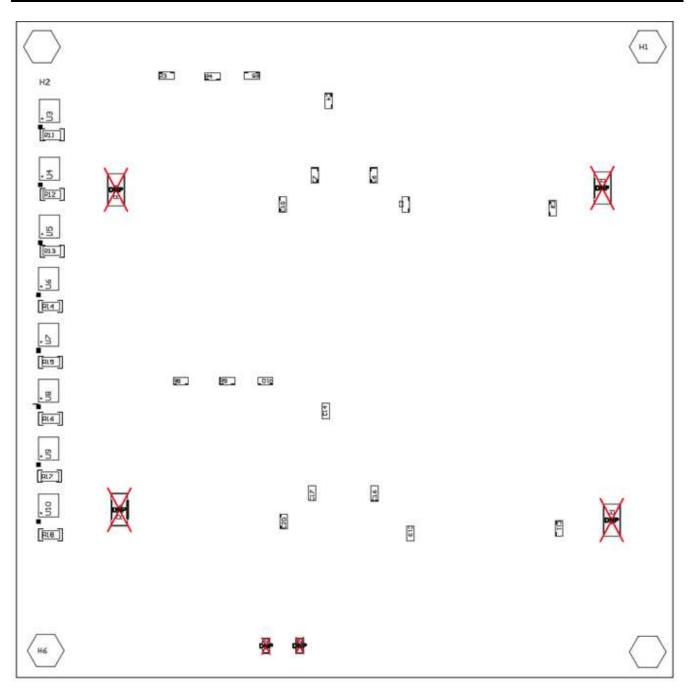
I²C Load Switch EVM Board Bottom Assembly
